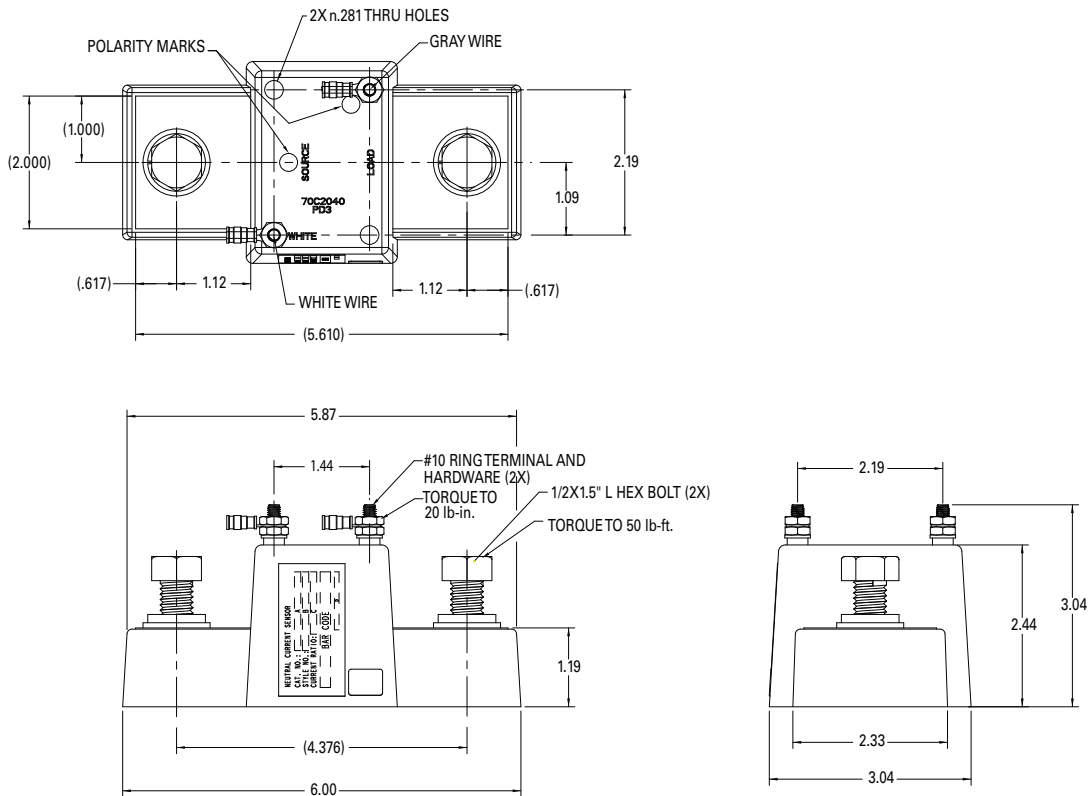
PD2, PD3 and PD4 Busbar Type Dimensions
